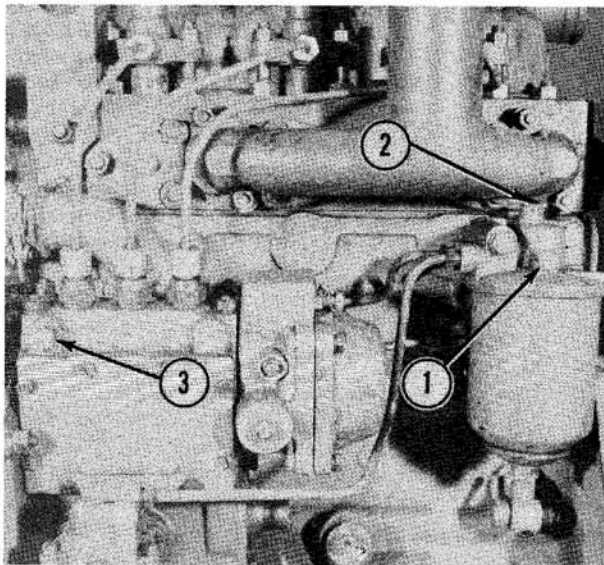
Fuel system showing the location of the three bleed screws in the order of tightening. (1) Filter inlet bleed screws. (2) Filter outlet bleed screw. (3) Injection pump bleed screw. Vacuum governor pump is shown; refer to Fig. FO534A for location of bleed screw on mechanical governor type pump.
